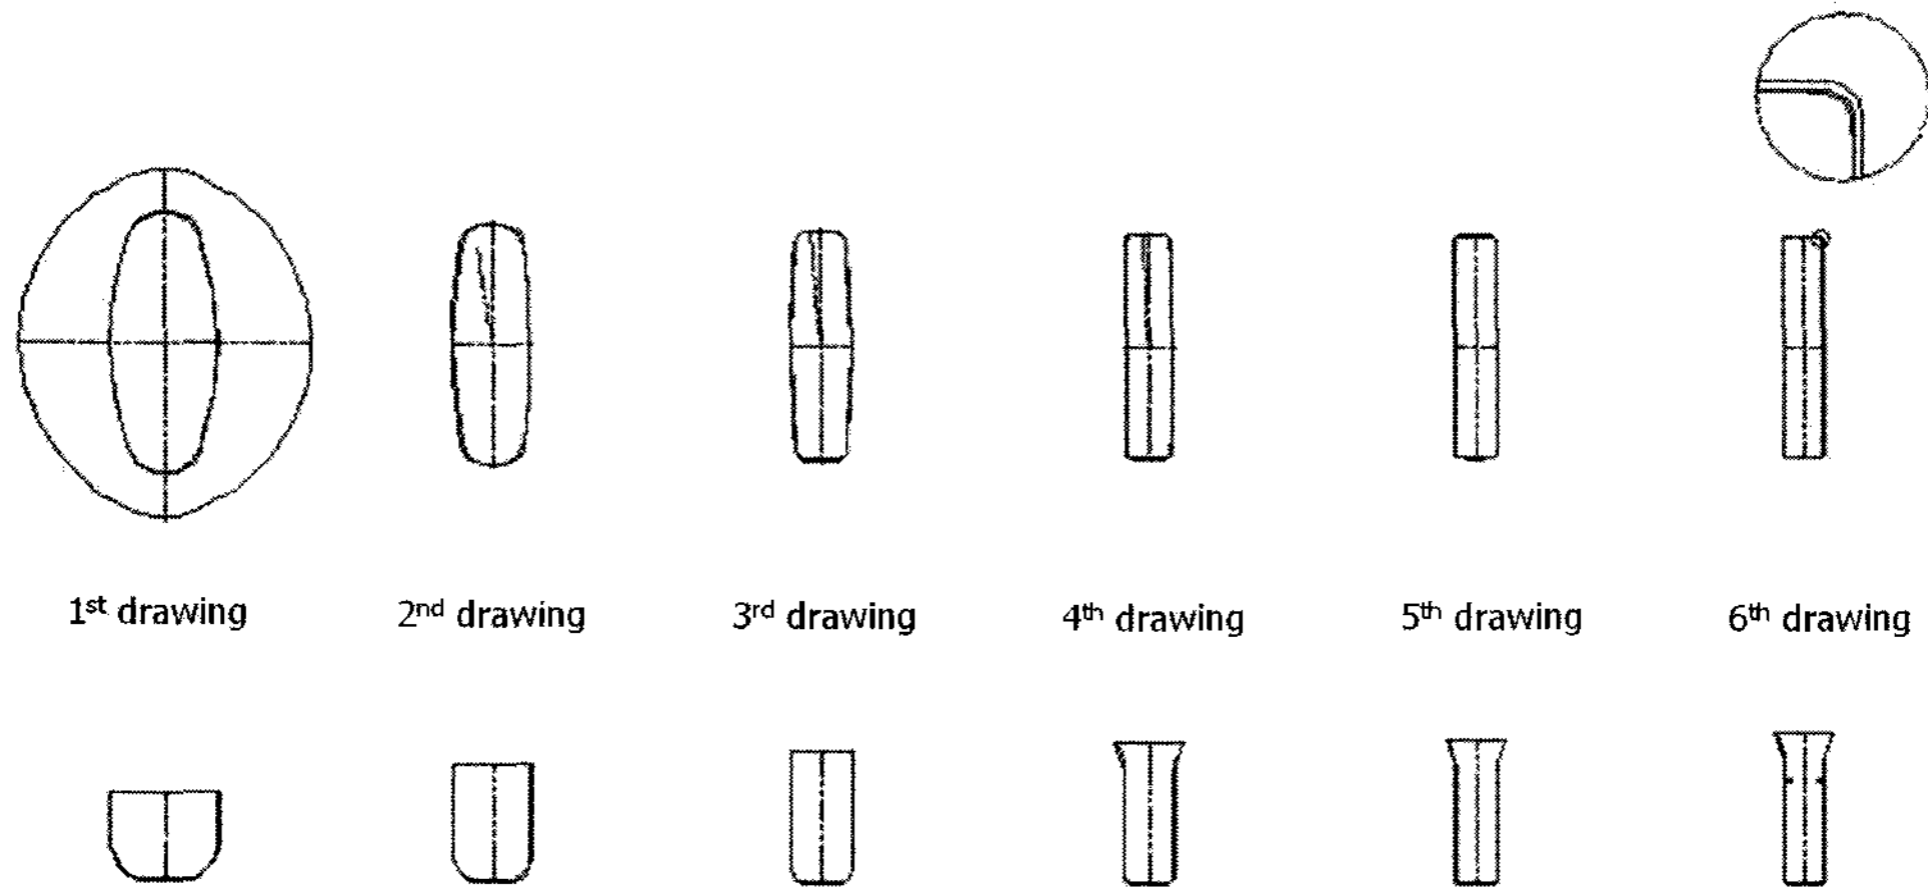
Intermediate blank layout for multi-stage deep drawing process of rectangular cup
